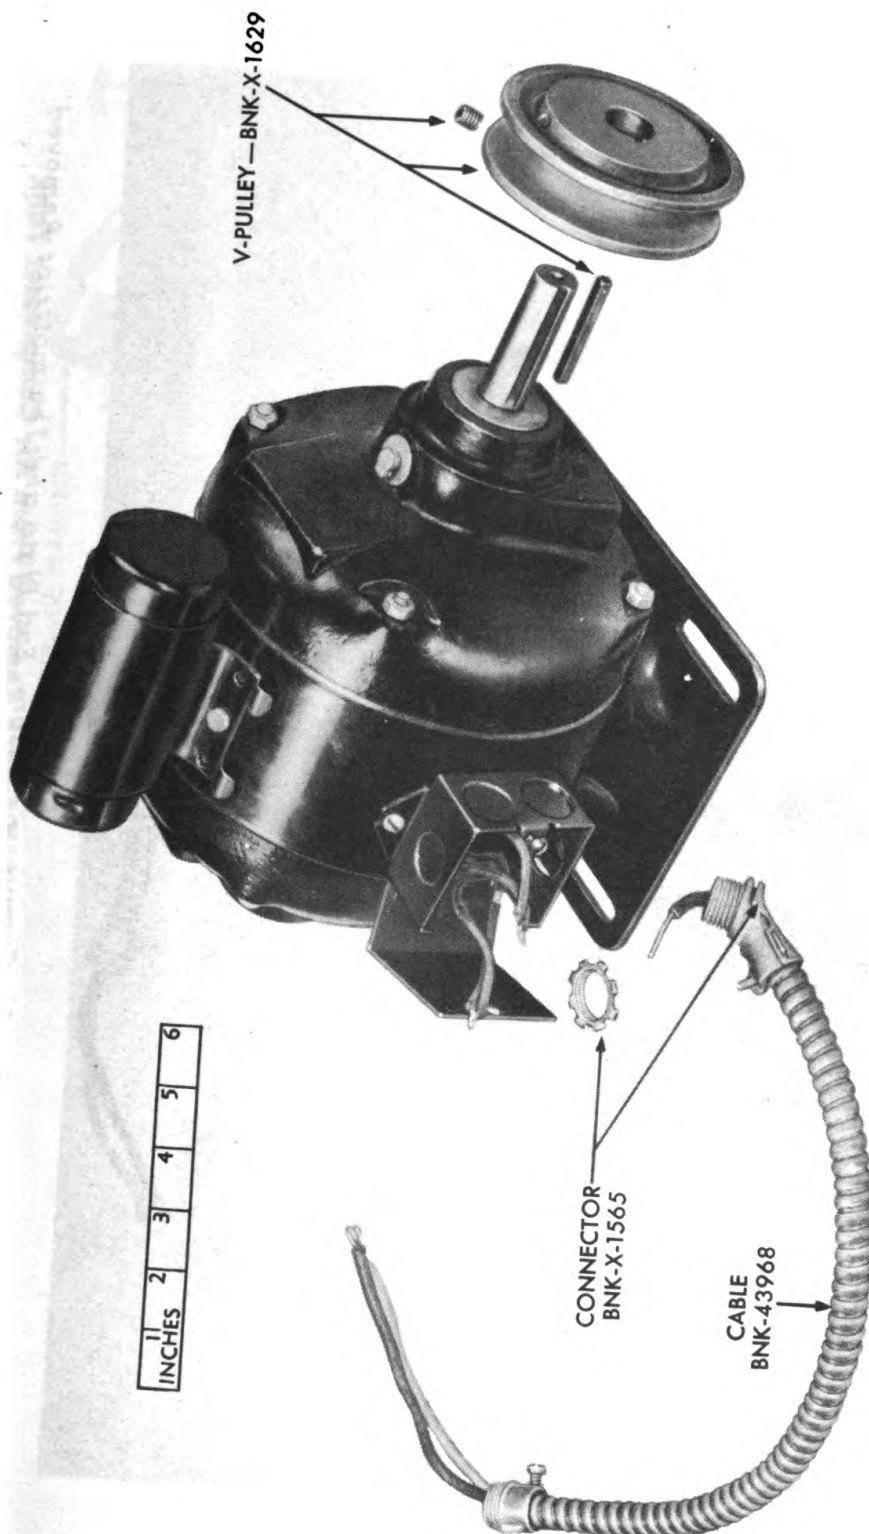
Air Compressor Motor — Pulley and Connecting Wires Removed
